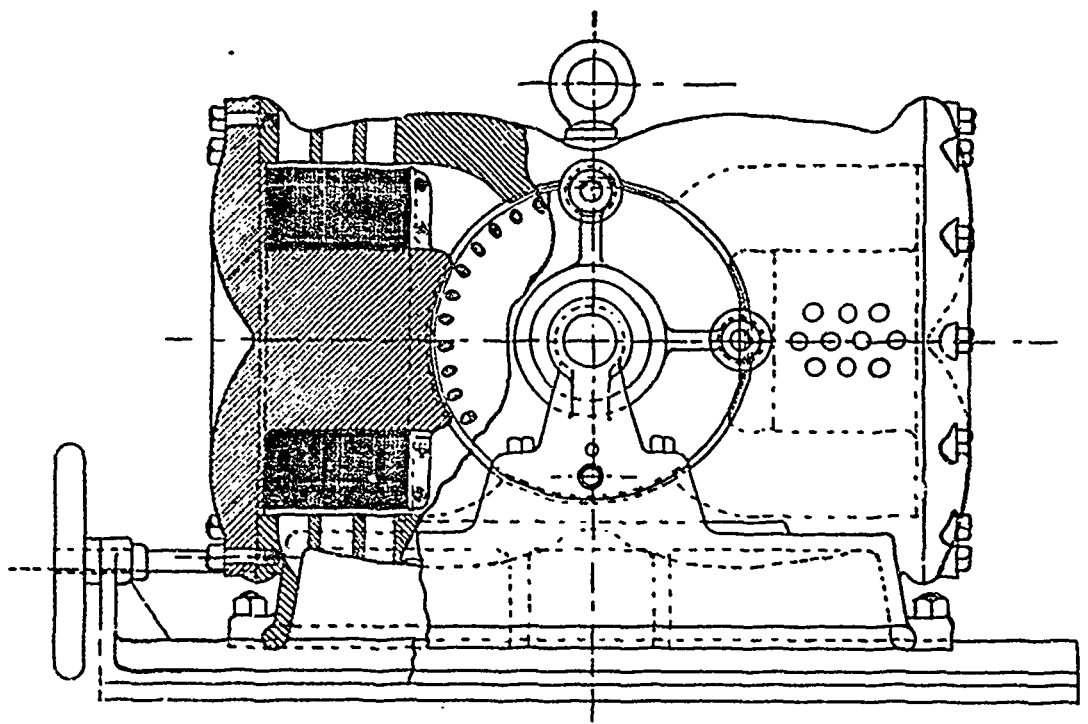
THE WENSTROM FOUR POLE GENERATOR (SECTIONAL SIDE VIEW) SHOWING FIELD COILS, POLE PIECES, ETC.
